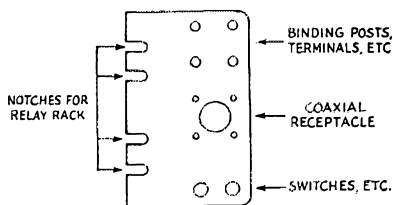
The auxiliary panel used by W3GKP for mounting feed-line terminals, jacks, control switches, speaker terminals, etc.
